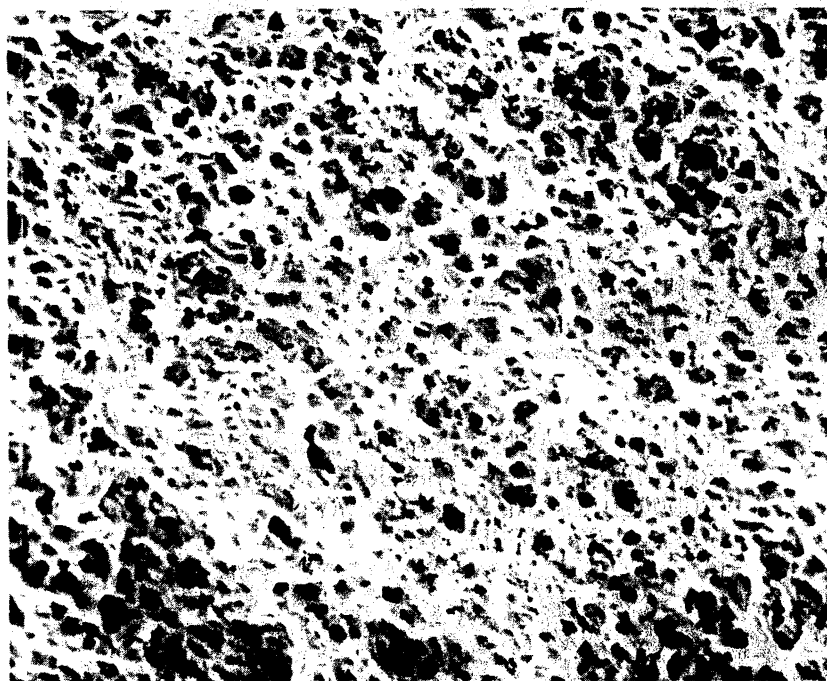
TYPICAL CLEAVAGE FRACTURE OBSERVED ON THE FRACTURE SURFACE THROUGH THE VESSEL SHELL PRODUCED IN THE LABORATORY (AREA 5 ON FIGURE 42)
